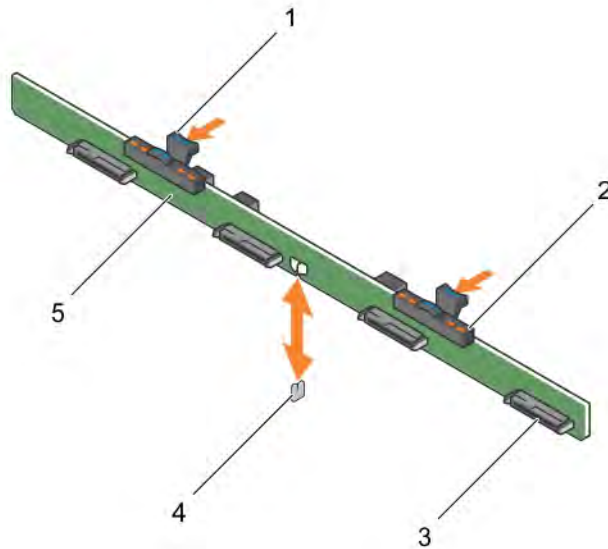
Removing and installing the 3.5 inch (x4) hard drive backplane
